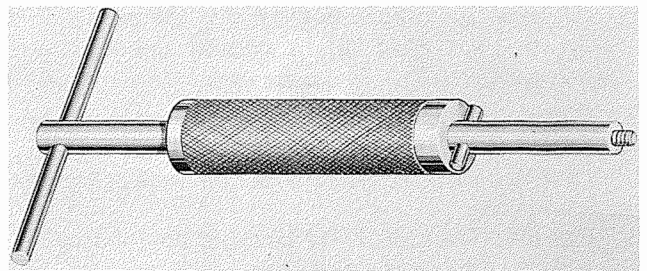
A. Fuel Injection Pump Drive Shaft Gear Puller
